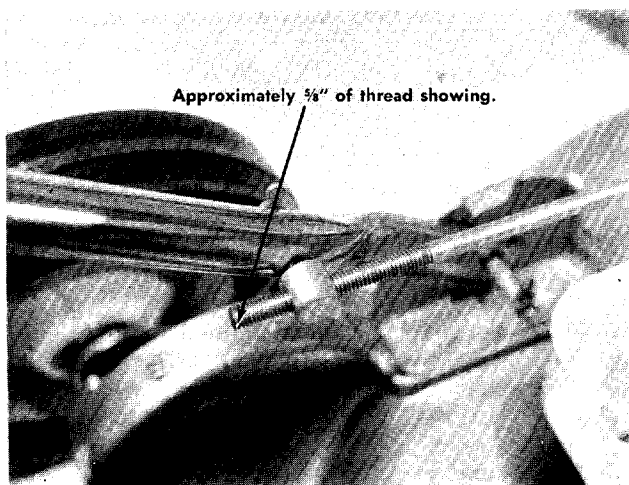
CLUTCH ROD SETTING FOR THE TWO LOWEST CUTTING HEIGHTS.
